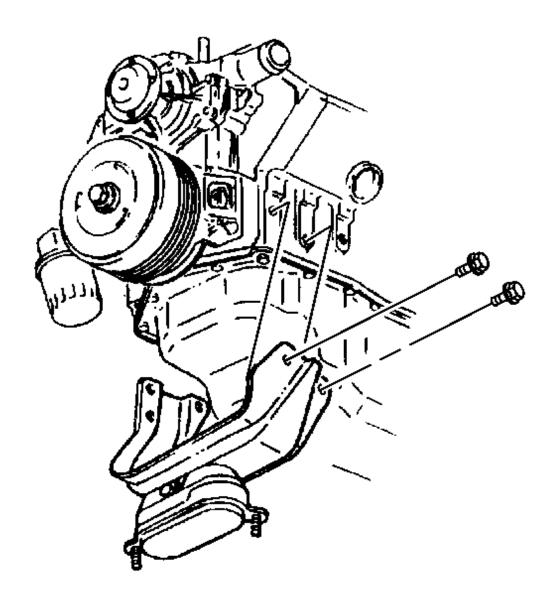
Left Engine Mount Bracket Bolts Courtesy of GENERAL MOTORS CORP.
